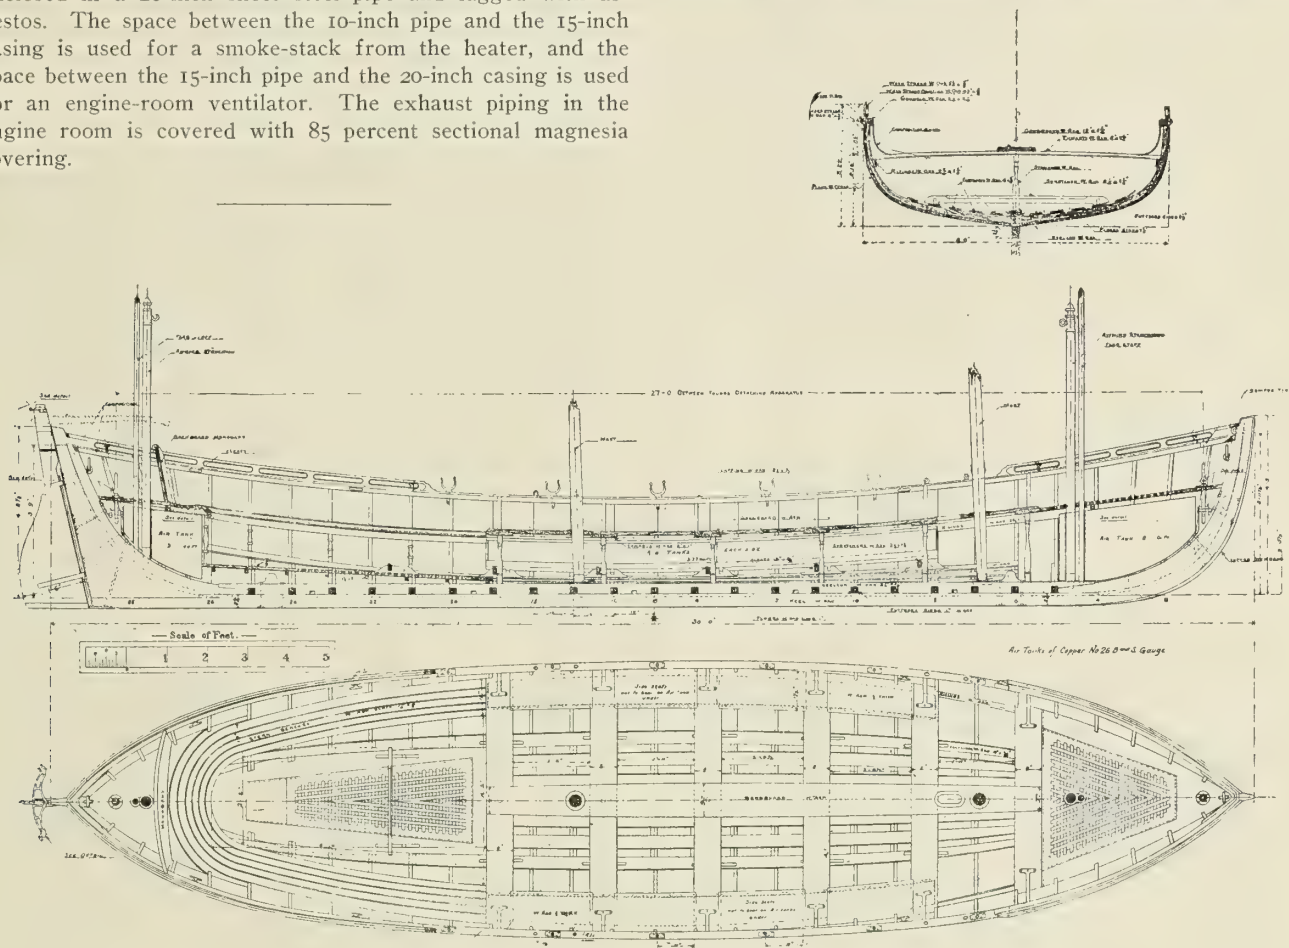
DETAILS OF CONSTRUCTION OF 30-FOOT WHALEBOAT.
